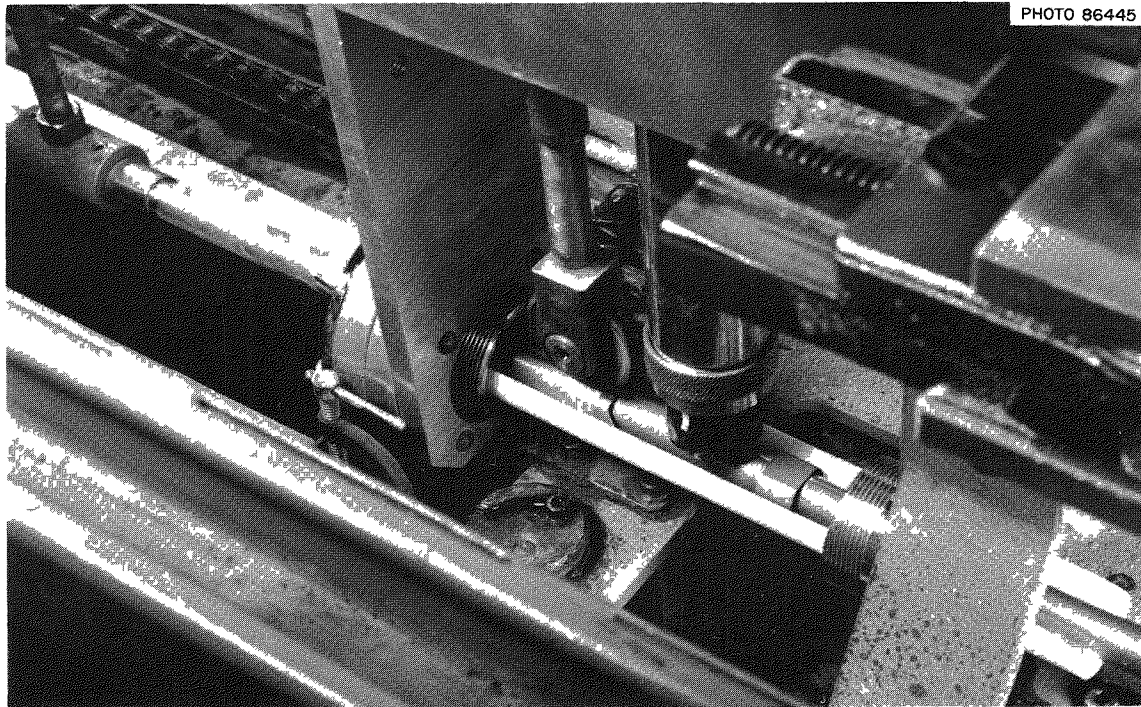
Tubing Tank Dolly Modified for Nonbond Inspection of Tube-to-Spacer Brazed Joints.
